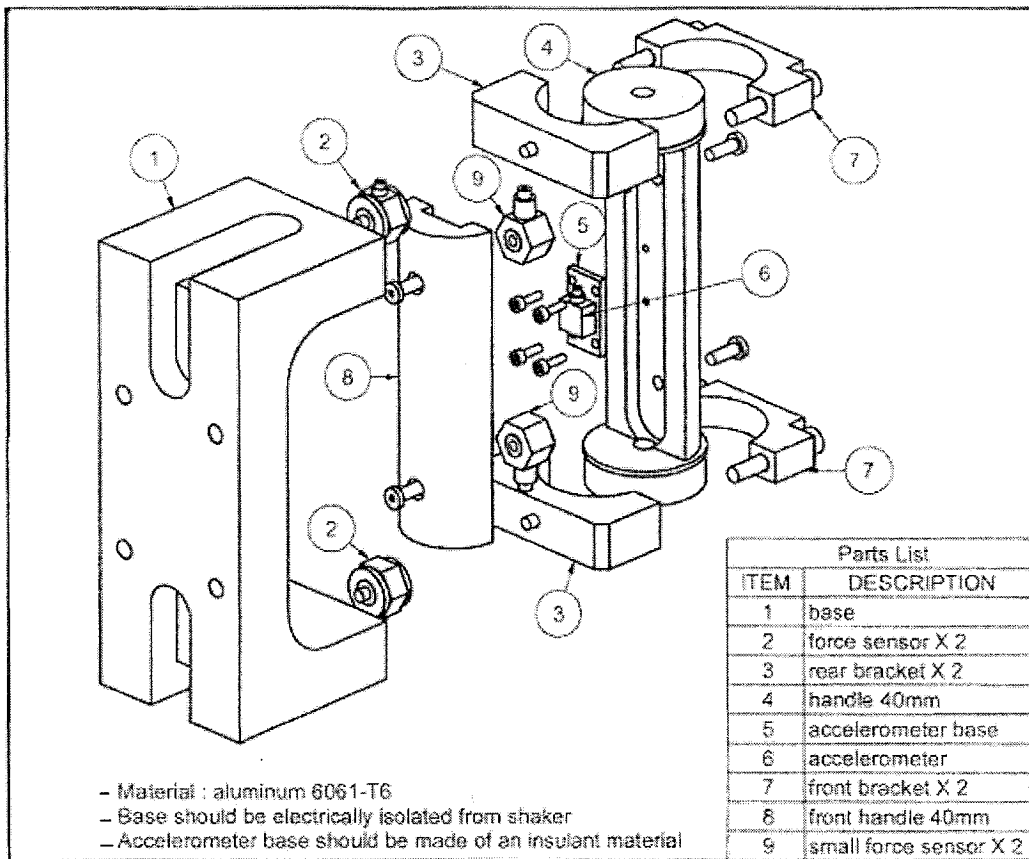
Exploded view of the instrumented handle (40 mm) and the support.
